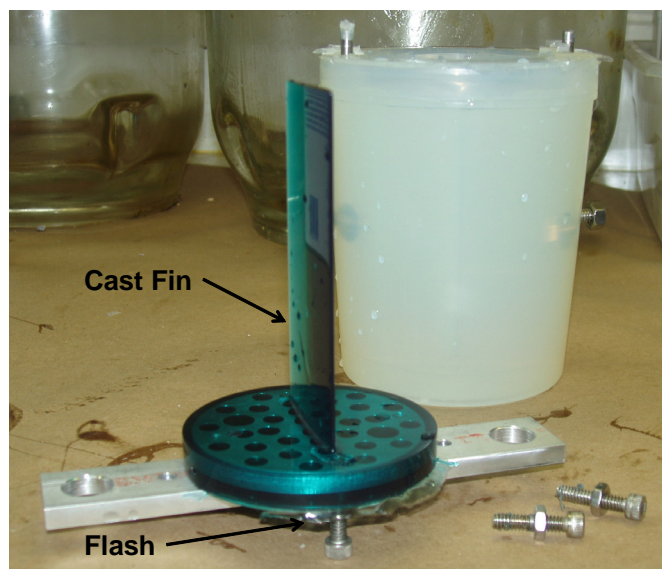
The cast fin is removed from the mold by submerging in water (see water droplets on outer surface of mold and fin); some flash exists on cast part which is removed using a sharp knife
